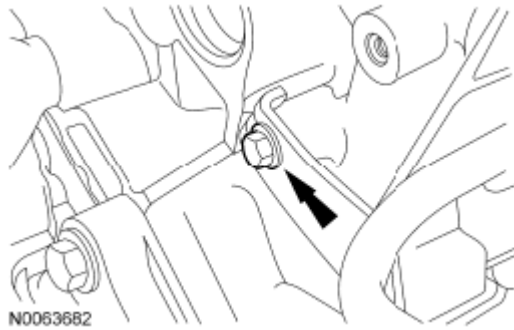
Locating Power Steering Pressure Tube & Bracket Assembly
